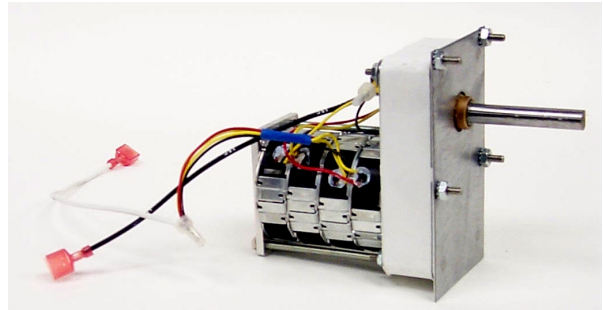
Note: The new motor comes with nuts in place on the mounting studs. Remove the nuts before installing the motor and use these nuts to fasten the motor in place.
